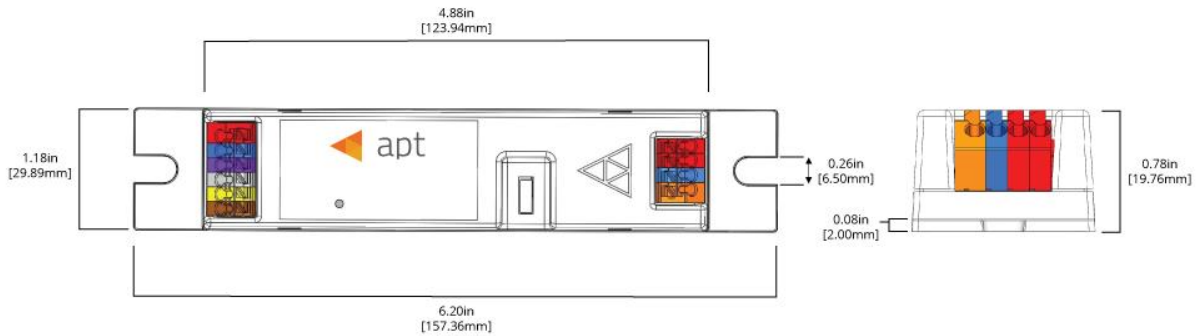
APT-CV2-Vx-LN-CVO Mechanical Drawing
